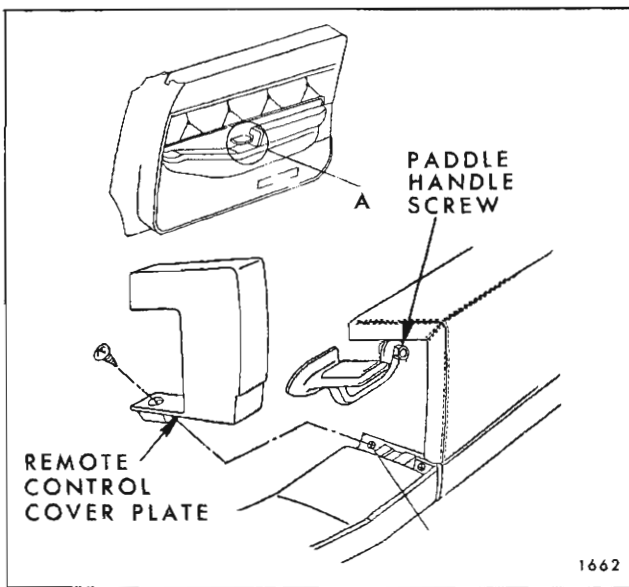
D11—Remote Control Handle and Cover Plate Front Door Shown - Rear Door Typical
